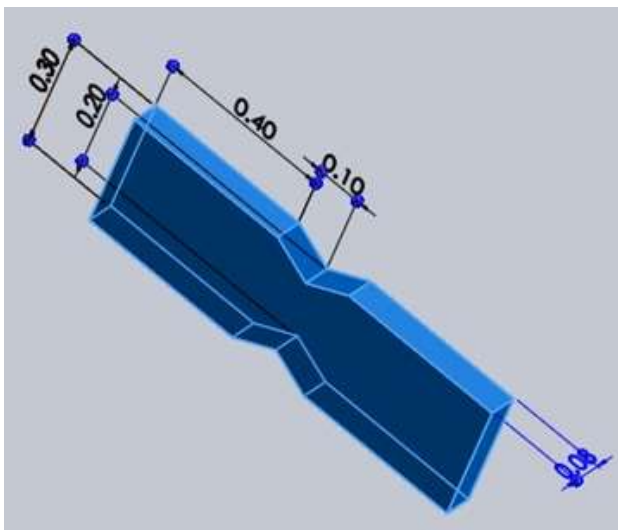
Modeling of the part manufactured in the 3D printer with the composite material used for tension (inch units)
